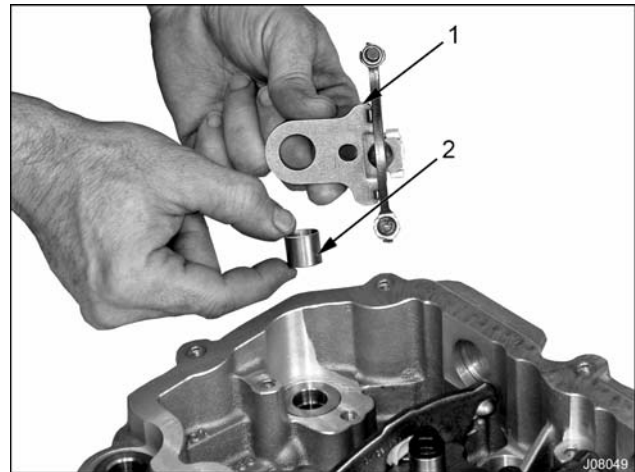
Removing the end fulcrum plate and fulcrum bolt spacer
